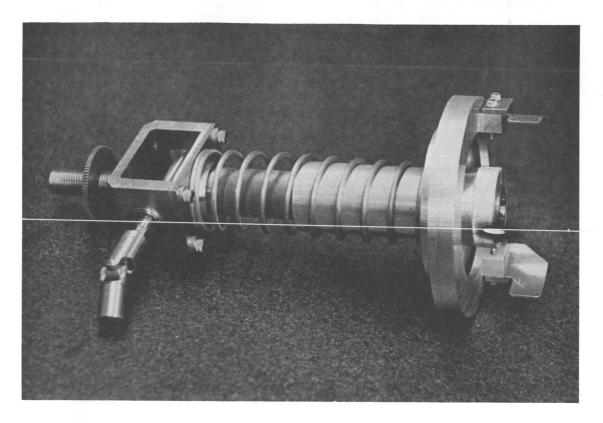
Focussing and drive unit showing universal joint for external drive, miter gear housing, focussing screw and gear, focussing spring, indexing plate, and bearing holders
